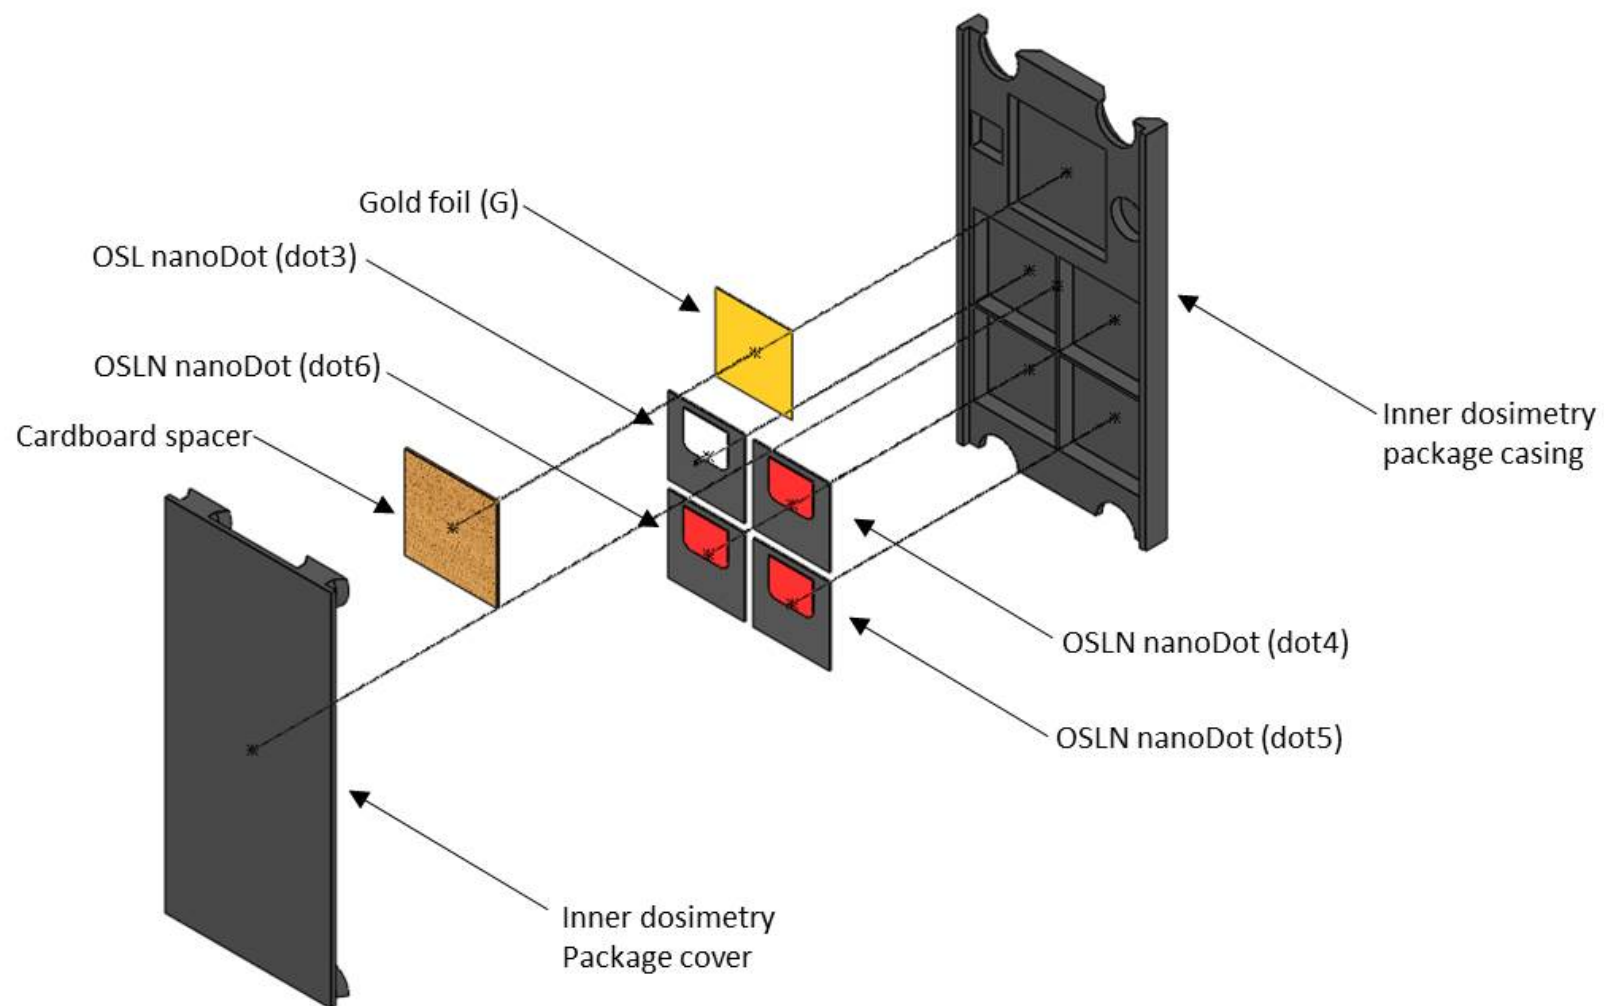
PNNL FNAD Inner Dosimetry Package (exploded view)
